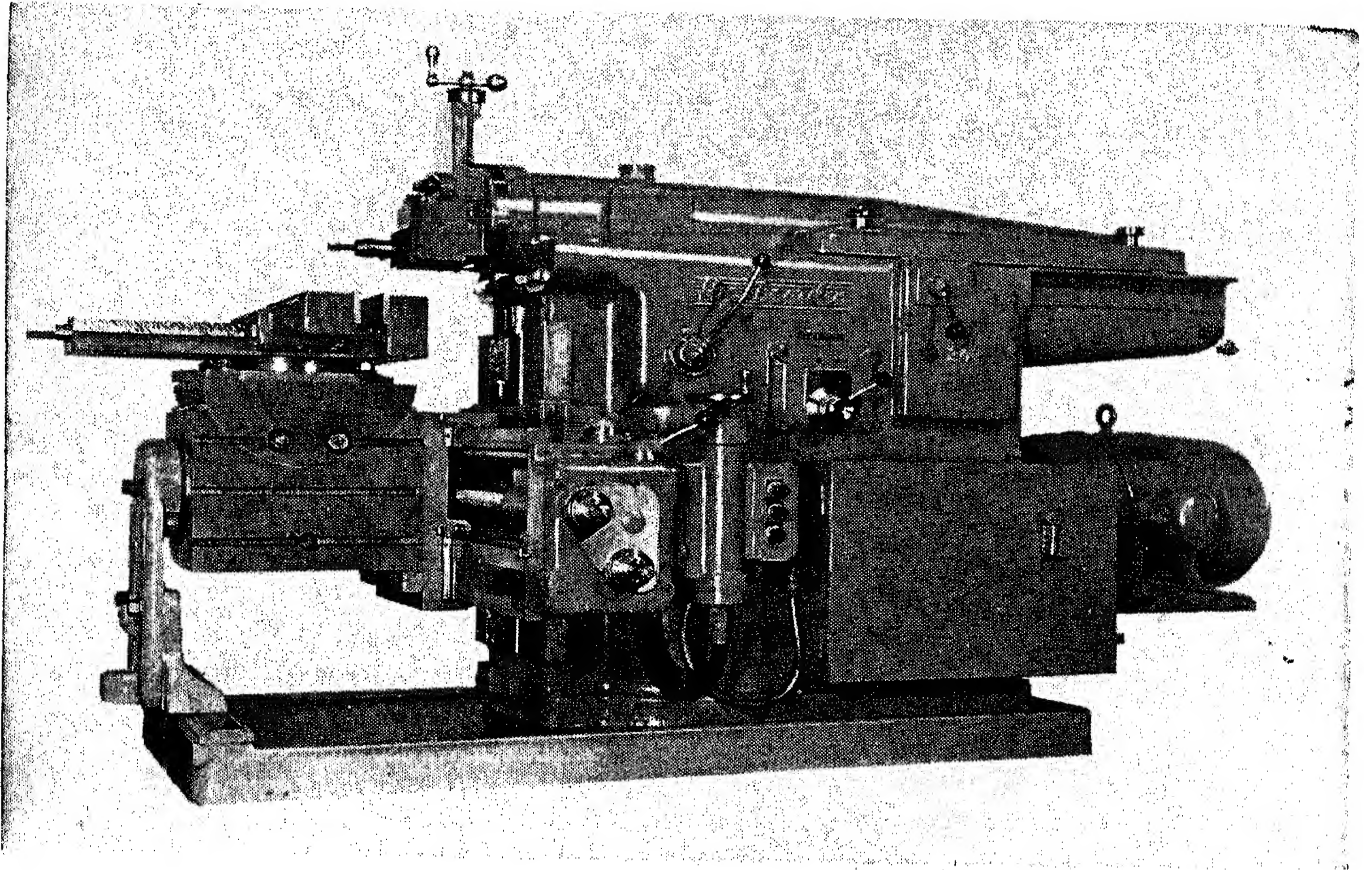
A 24 in. universal high speed hydraulic drive shaper. (Courtesy Rockford Machine Tool Co.)
